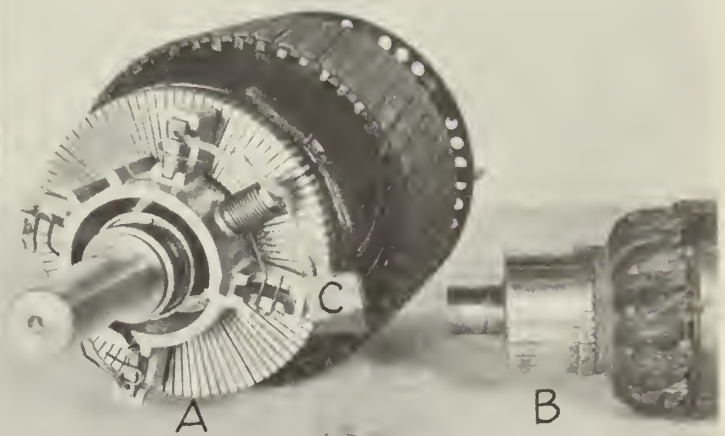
Wound rotors showing a disk-type commutator, A, and a cylinder-type commutator, B. One of the brushes, C, has been removed from its holder.
